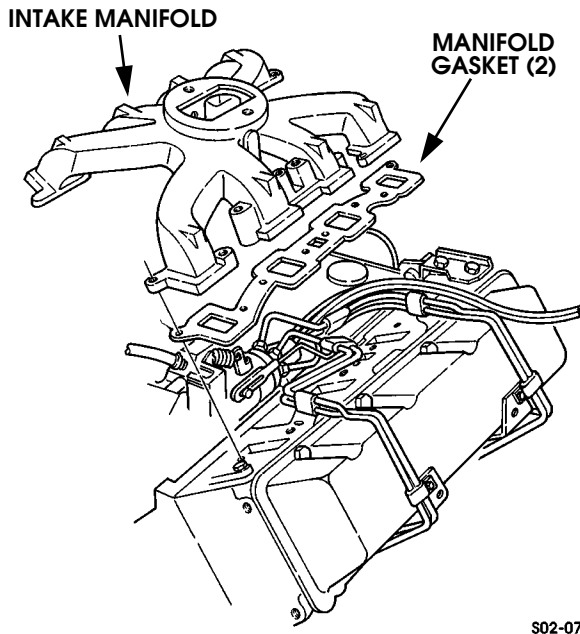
Intake Manifold Fastener Removal (Non-Turbo)
